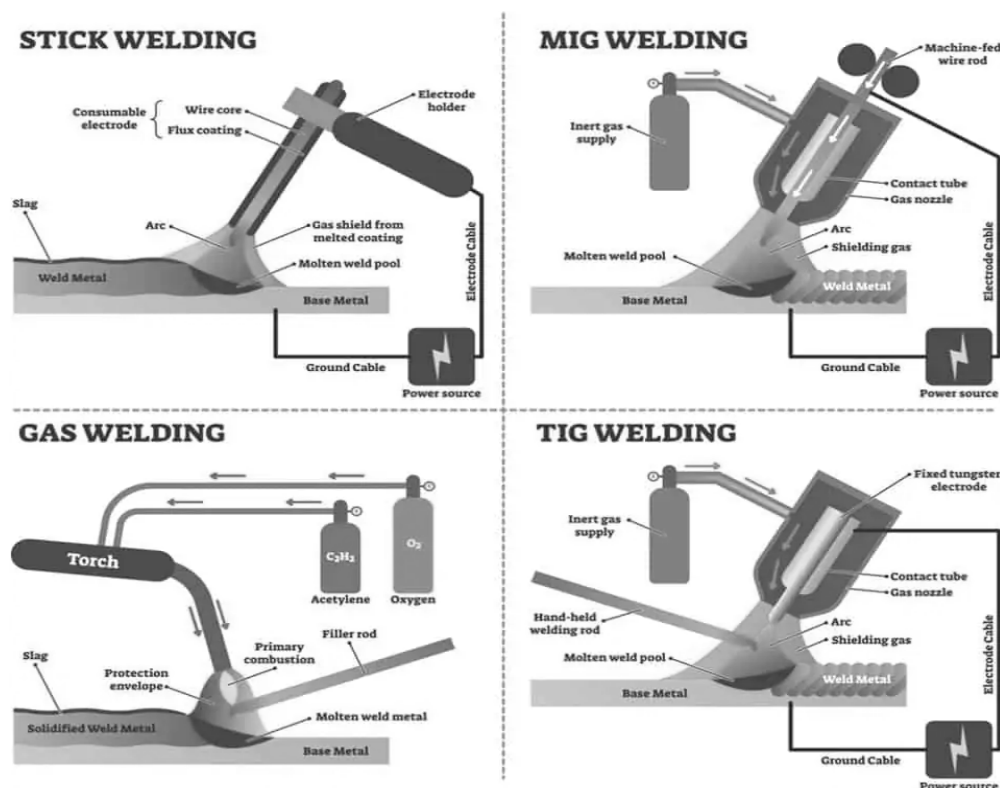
Welding Methods (Source: <https://toolshaven.com>)
